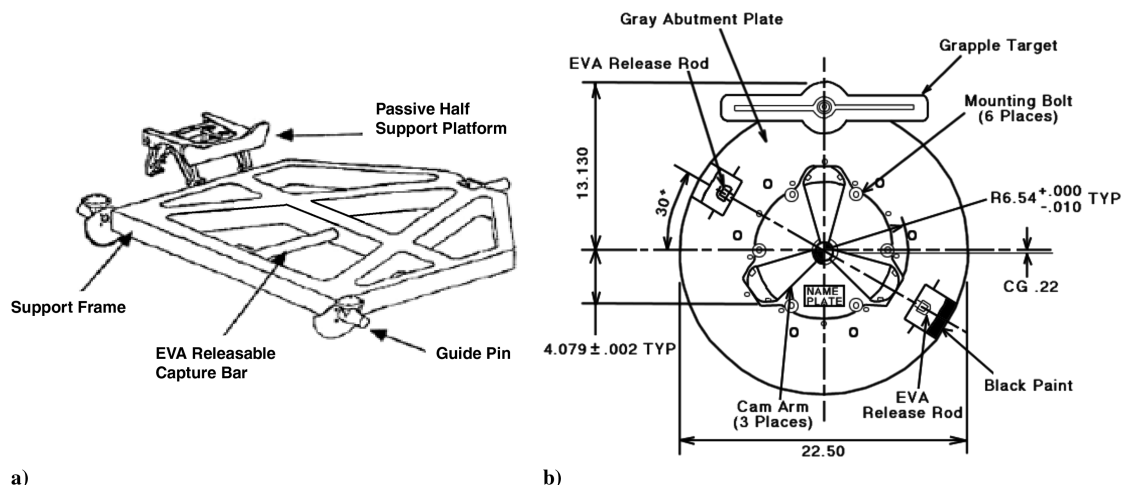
Mechanisms: a) passive PAS and b) FRGF.
